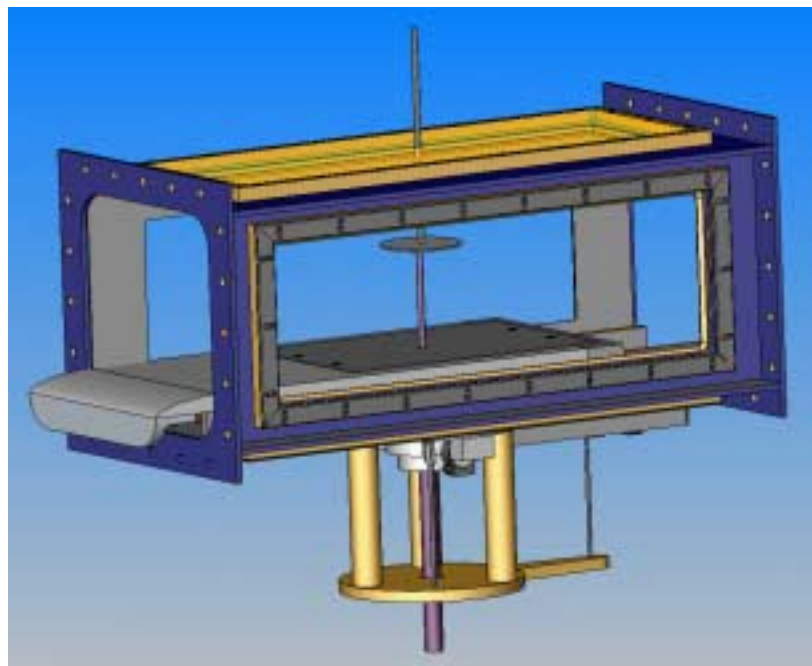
3D solid model assembly of cylinder experiment setup
